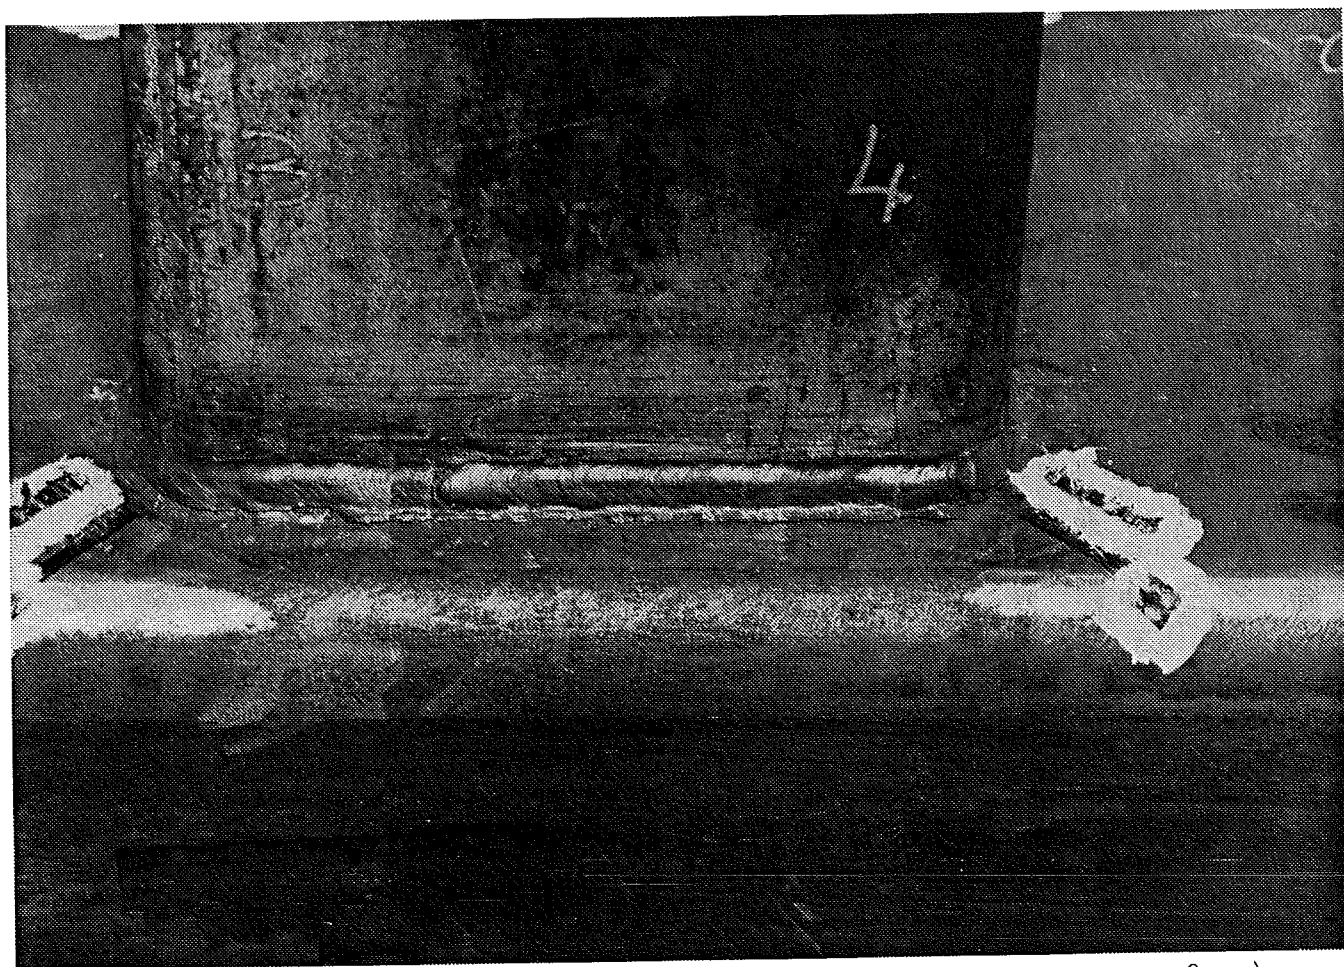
Typical crack shape of a T-joint specimen (brace thickness 8 mm)
